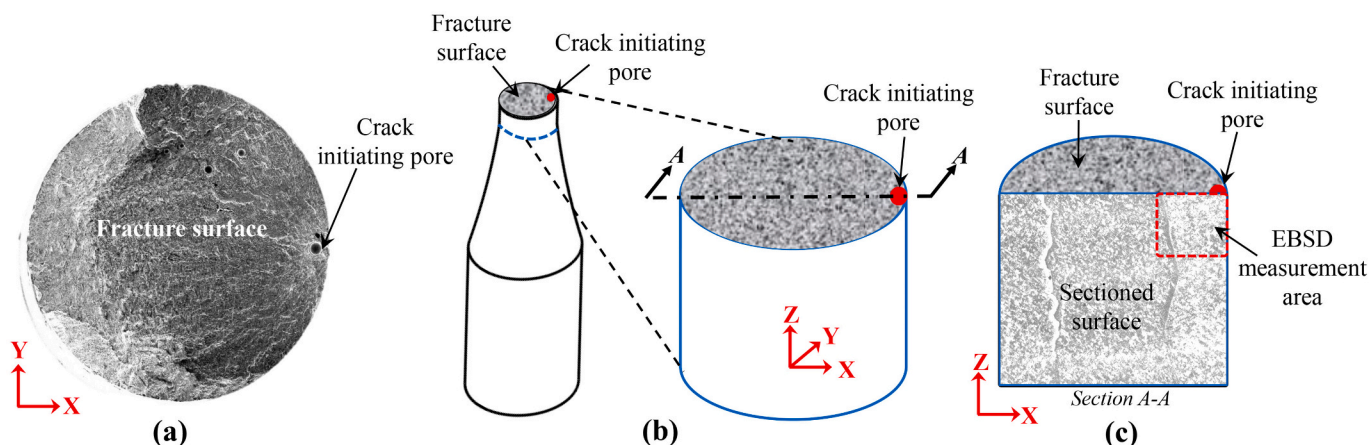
(a) Example of a fracture surface showing the crack initiating defect, (b) schematic of a fractured sample showing sample extraction for EBSD analysis, (c) sample for EBSD analysis showing sectioned micrograph on the X-Z plane and location of EBSD measurement area around crack initiating defect.
